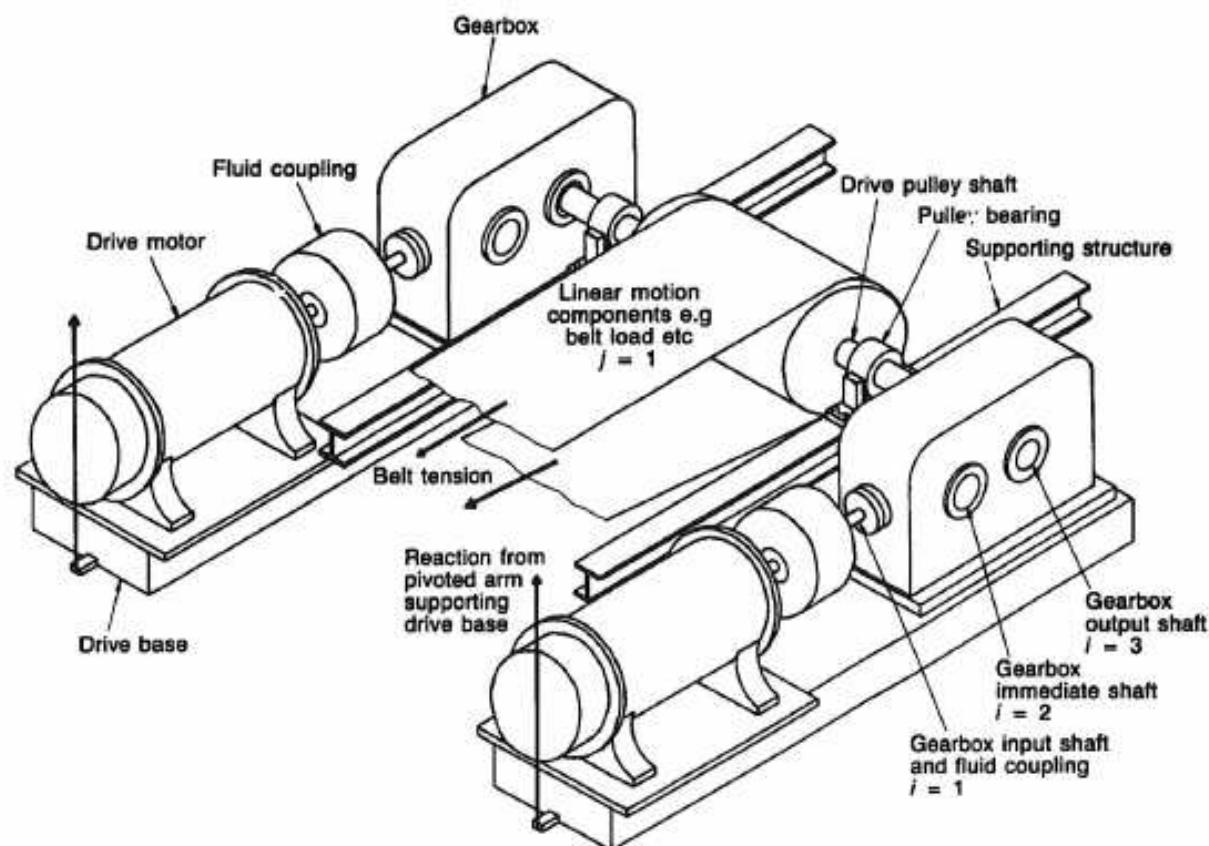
DIAGRAM OF CONVEYOR DRIVE
